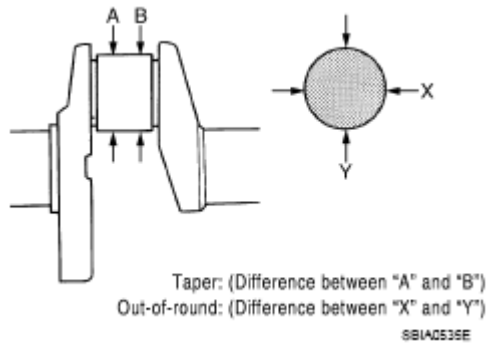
Identifying Crank Shaft Taper And Out Of Round Dimensions
